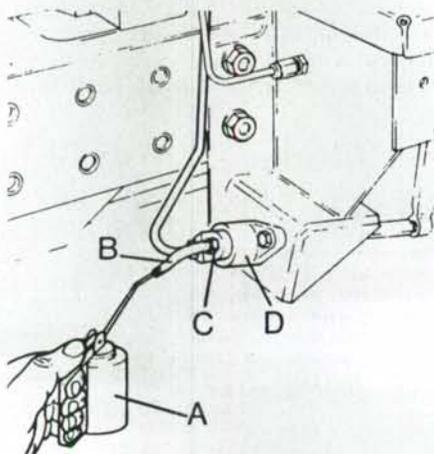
Use pressure oil can (A) connected to air screw (C) on slave cylinder (D) by flexible tube (B) to bleed air from clutch hydraulic system.
